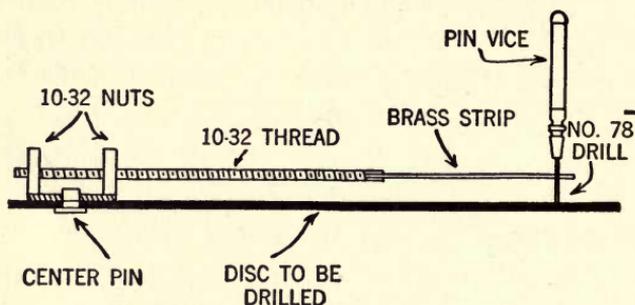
Drilling jig used in accurately locating and drilling the holes in scanning discs. This jig takes advantage of the fact that a 10-32 screw thread causes a rod to advance .015 of an inch for every half revolution.
